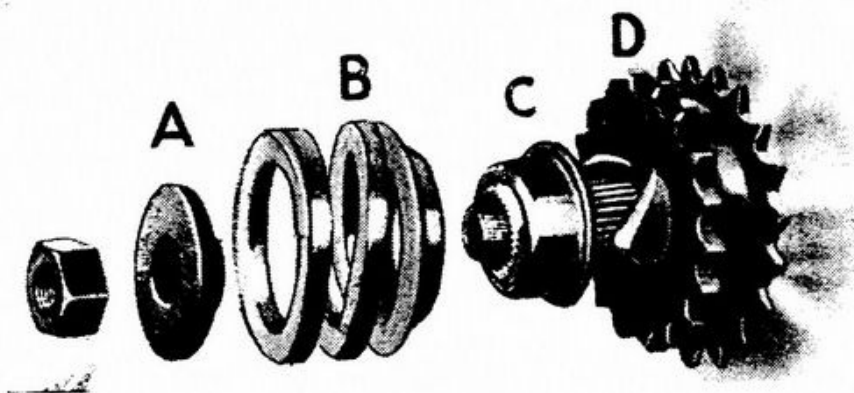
THE ENGINE SHAFT SHOCK ABSORBER.
